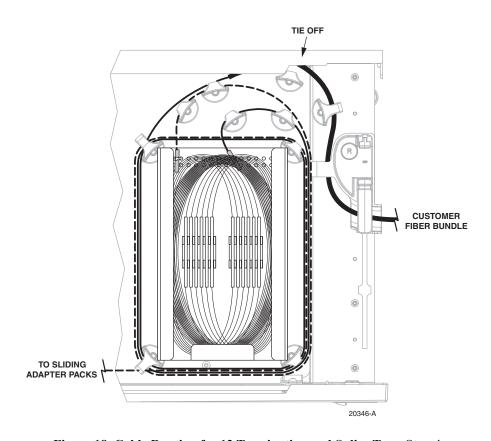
Cable Routing for 12 Termination and Splice Tray, Step 4
